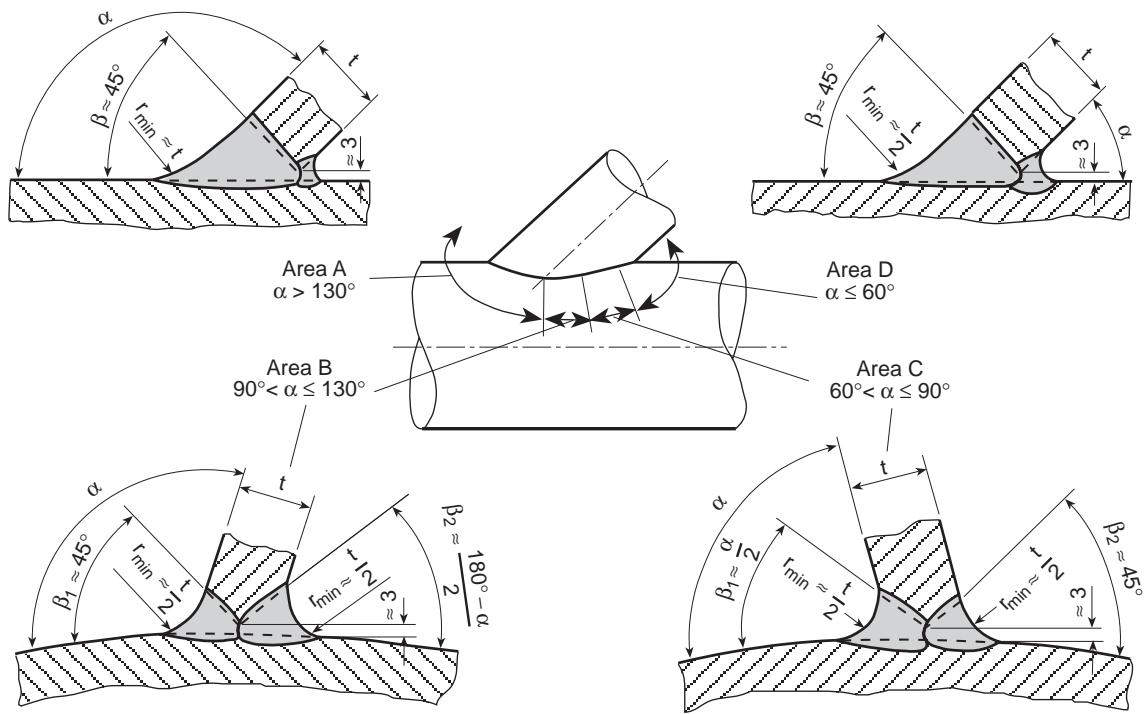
Typical tubular weld connections with back welding
